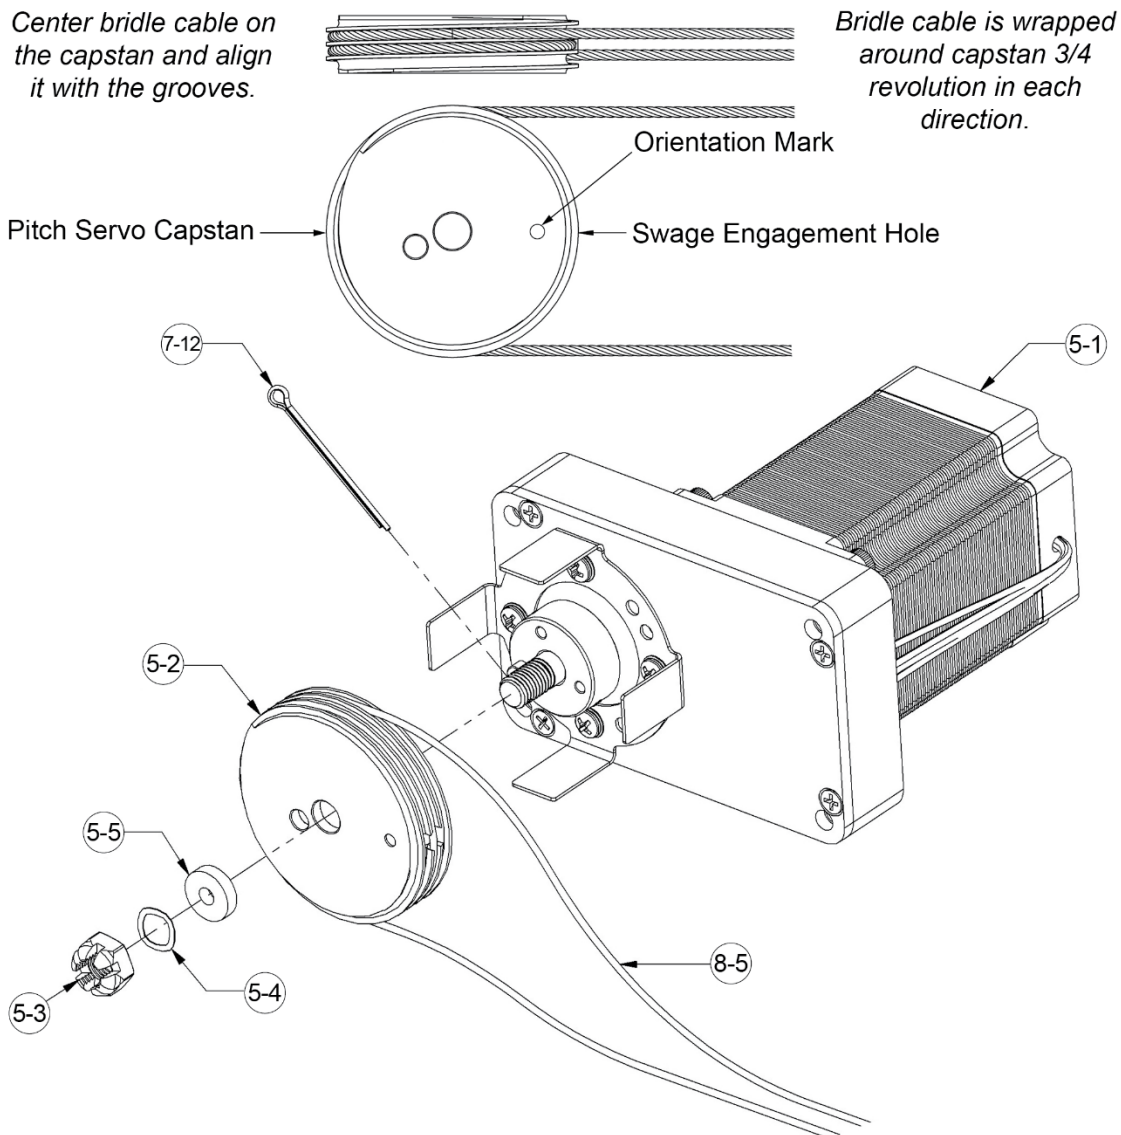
Wrapping Bridle Cable and Attaching Capstan to Pitch Servo
